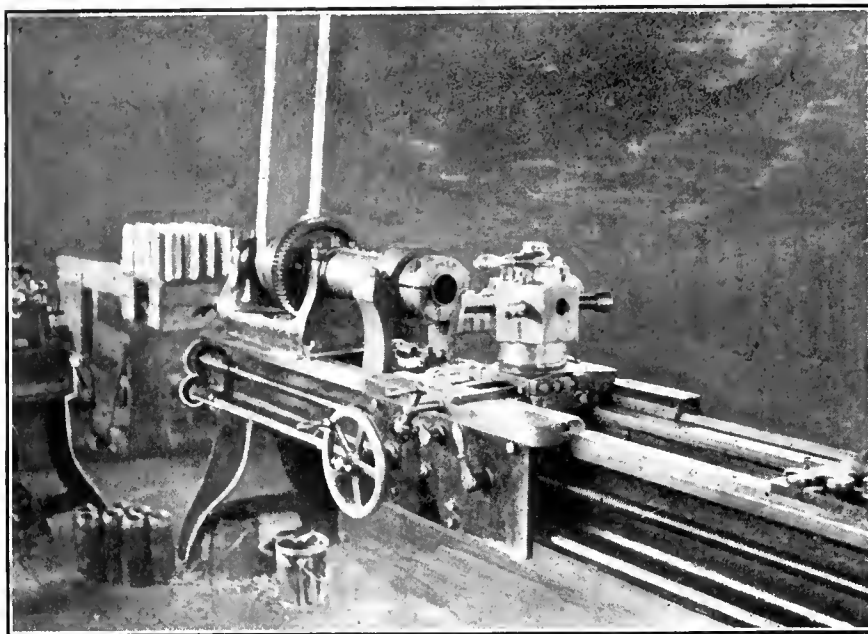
LONDON MACHINE TOOL CO. ENGINE LATHE FITTED WITH SPECIAL TURRET ON CARRIAGE FOR MACHINING INSIDE OF NOSE.
